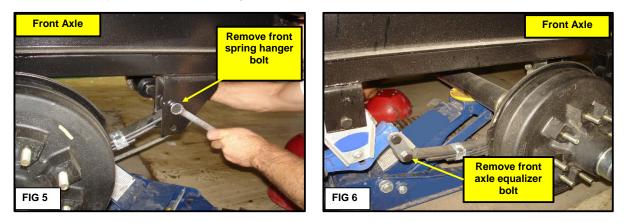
Use the 11/16 socket and the 13/16 box end wrench to remove the nut from the spring hanger bolt.
